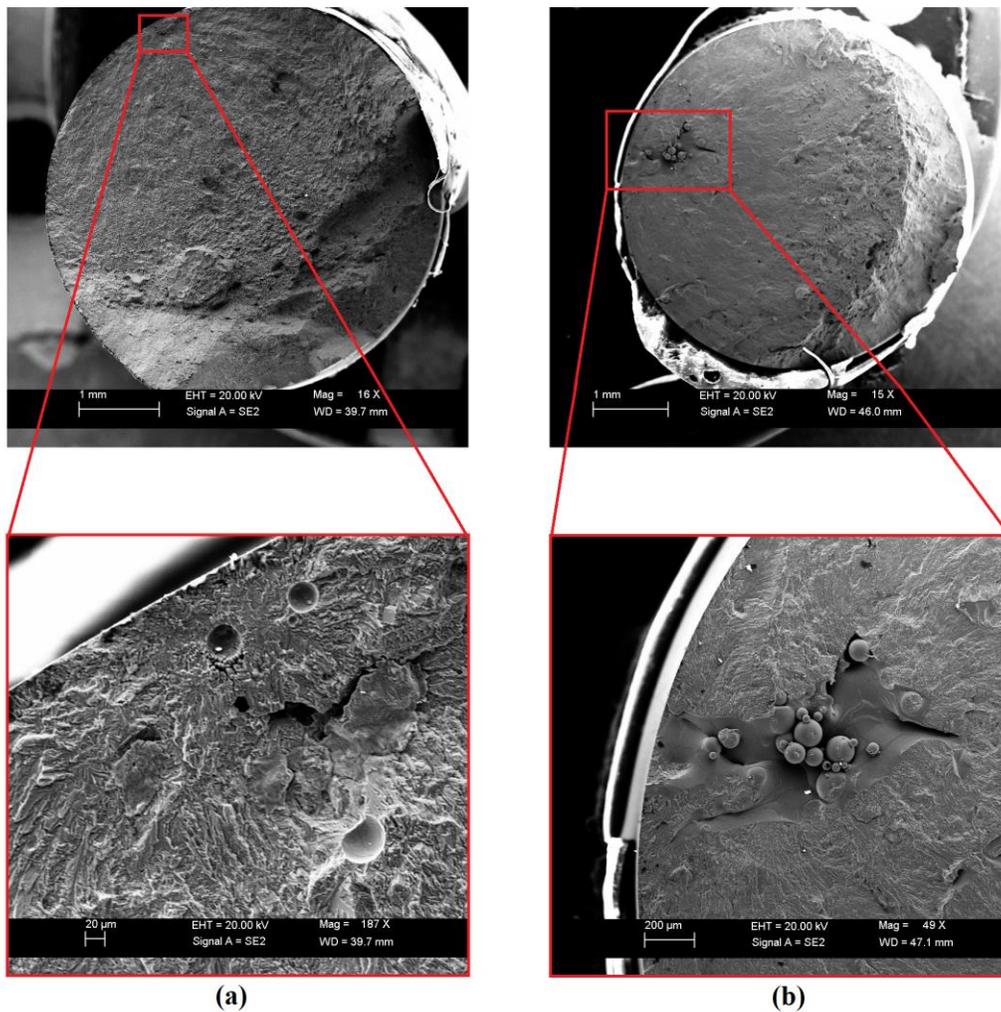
Representative fatigue fracture surfaces for (a) single built and (b) double built LENS Ti-6Al-4V specimens.
